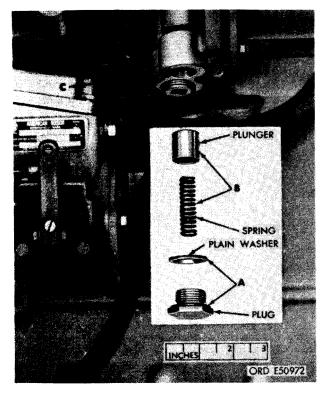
REMOVING, INSTALLING, AND INSPECTING OIL COOLER BYPASS VALVE.
